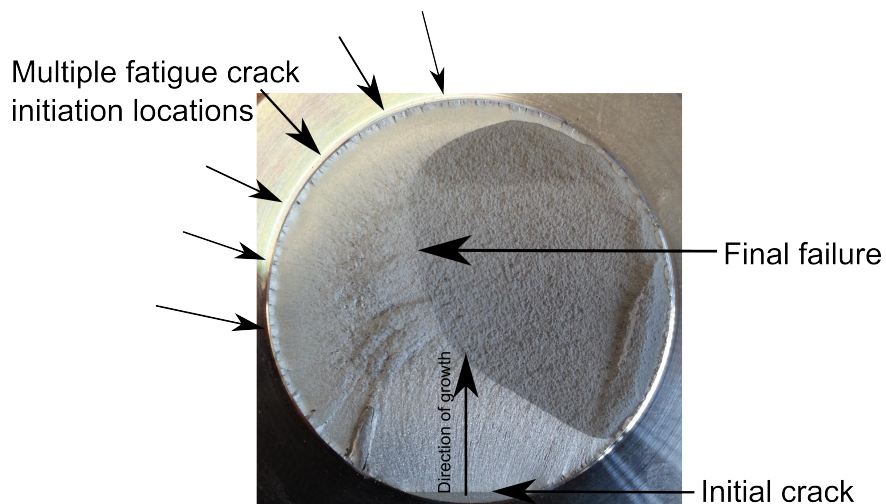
Picture of the fracture surface of specimen 1Z06.
